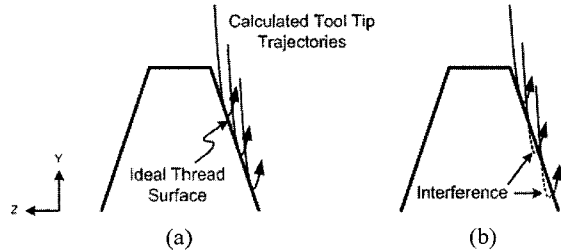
(a) Thread cutting without interference, (b) Thread cutting with interference
